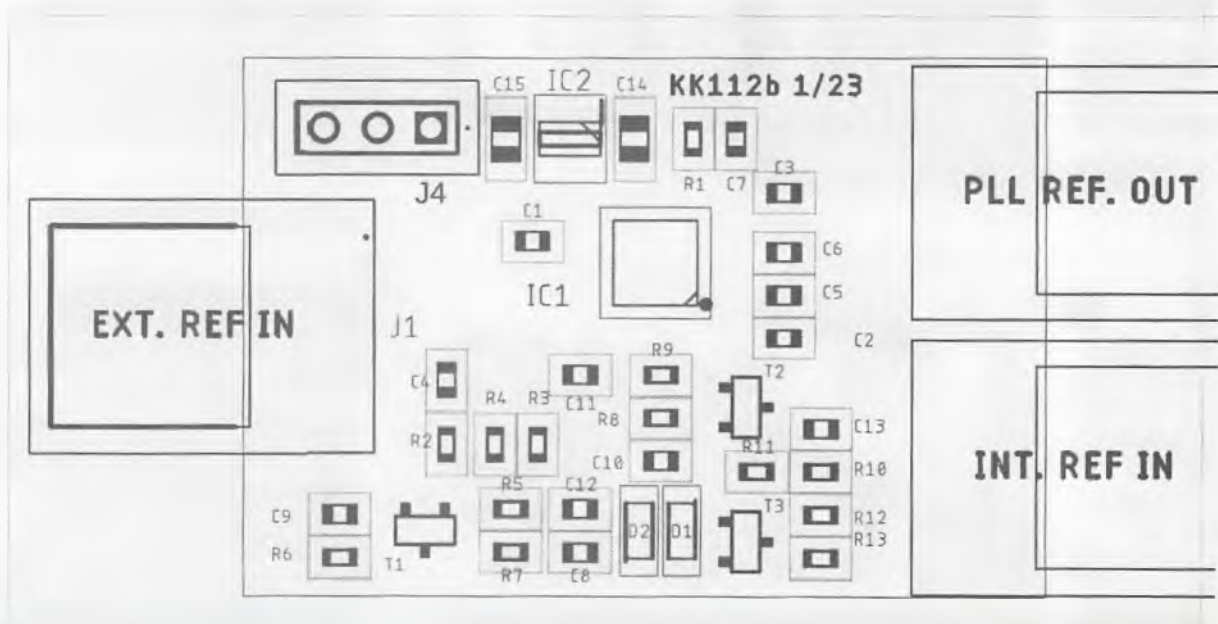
PLL reference switch PCB layout (top side - single-sided board).
